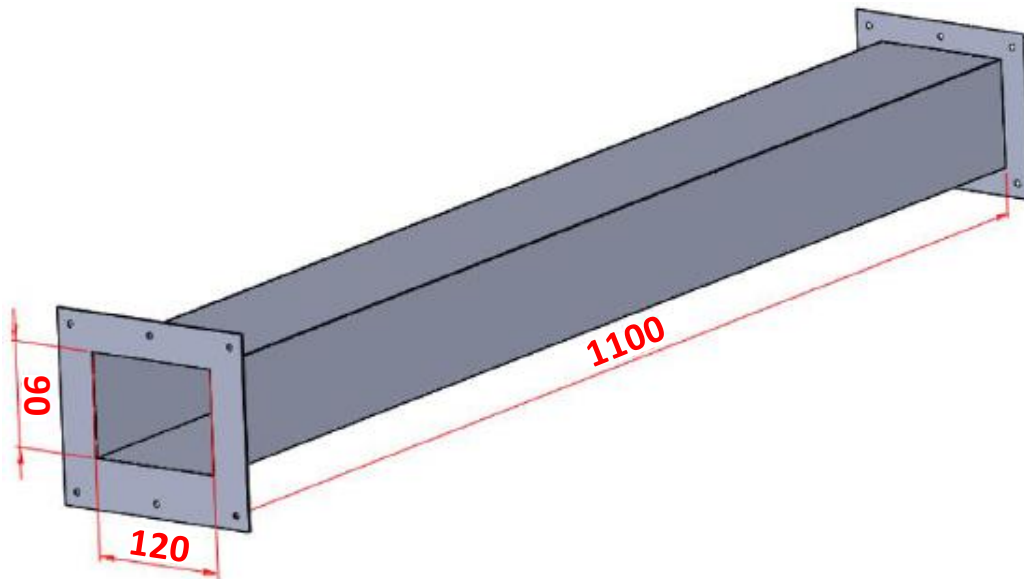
Dimensioned (in mm) schematic of the pre-test section.
